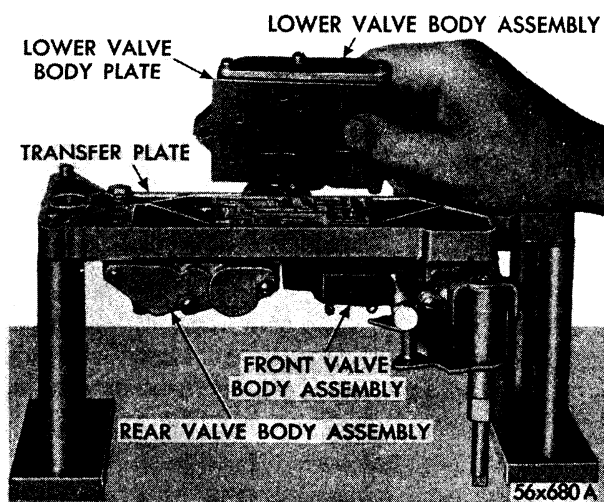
Removal and Installation of Lower Valve Body Assembly and Plate
